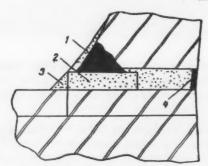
Method for correcting large (but short) hole; 1) chrome paste; 2) sheet steel tube with magnesite; 3) magnesite powder; 4) refractory plug.
